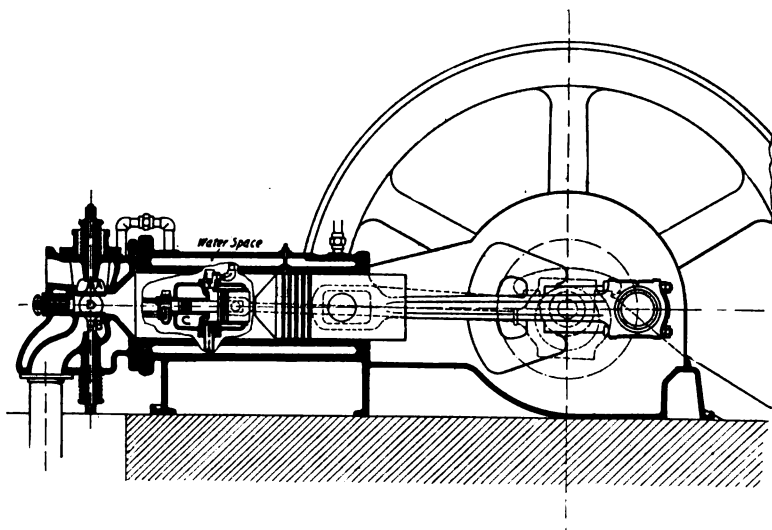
LONGITUDINAL SECTION OF OIL ENGINE
